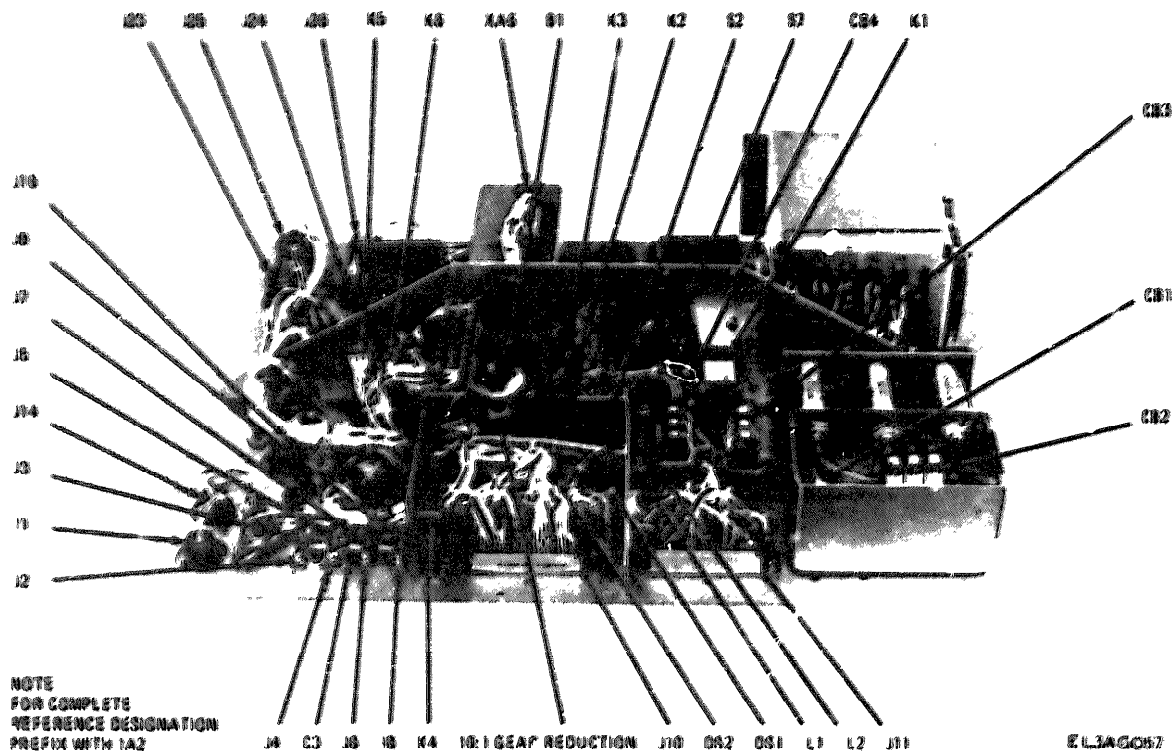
Test Set Subassembly Mx-8638A/APS-94D, Unit 1A2, rear chassis top view, parts location.
